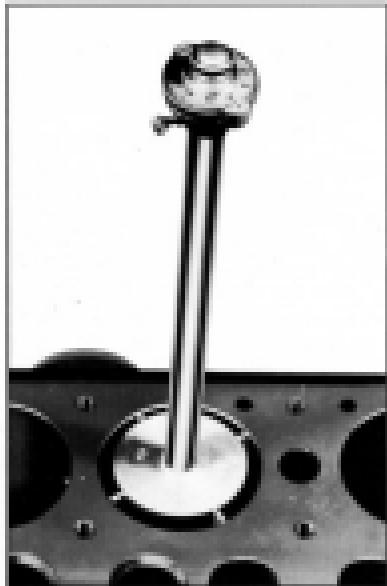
Determining Cylinder Size with Tool HMD 51.
